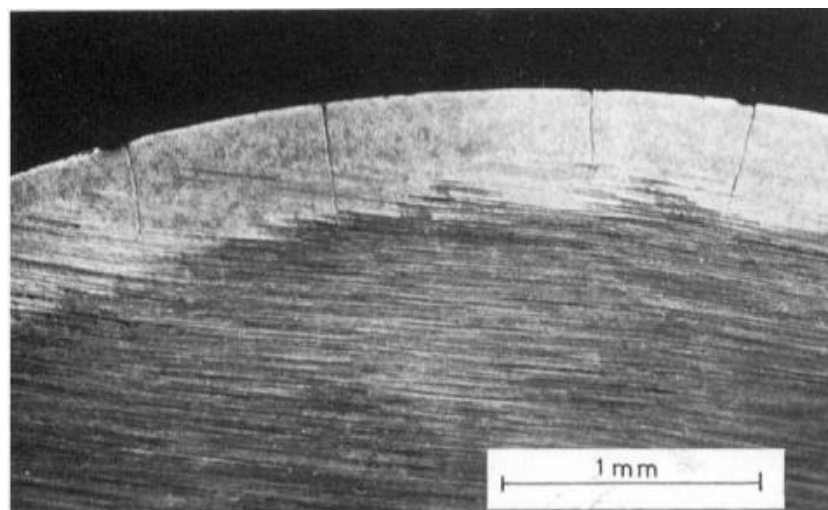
Thermal fatigue cracks in cemented carbide tool after interrupted cutting of steel [32].
